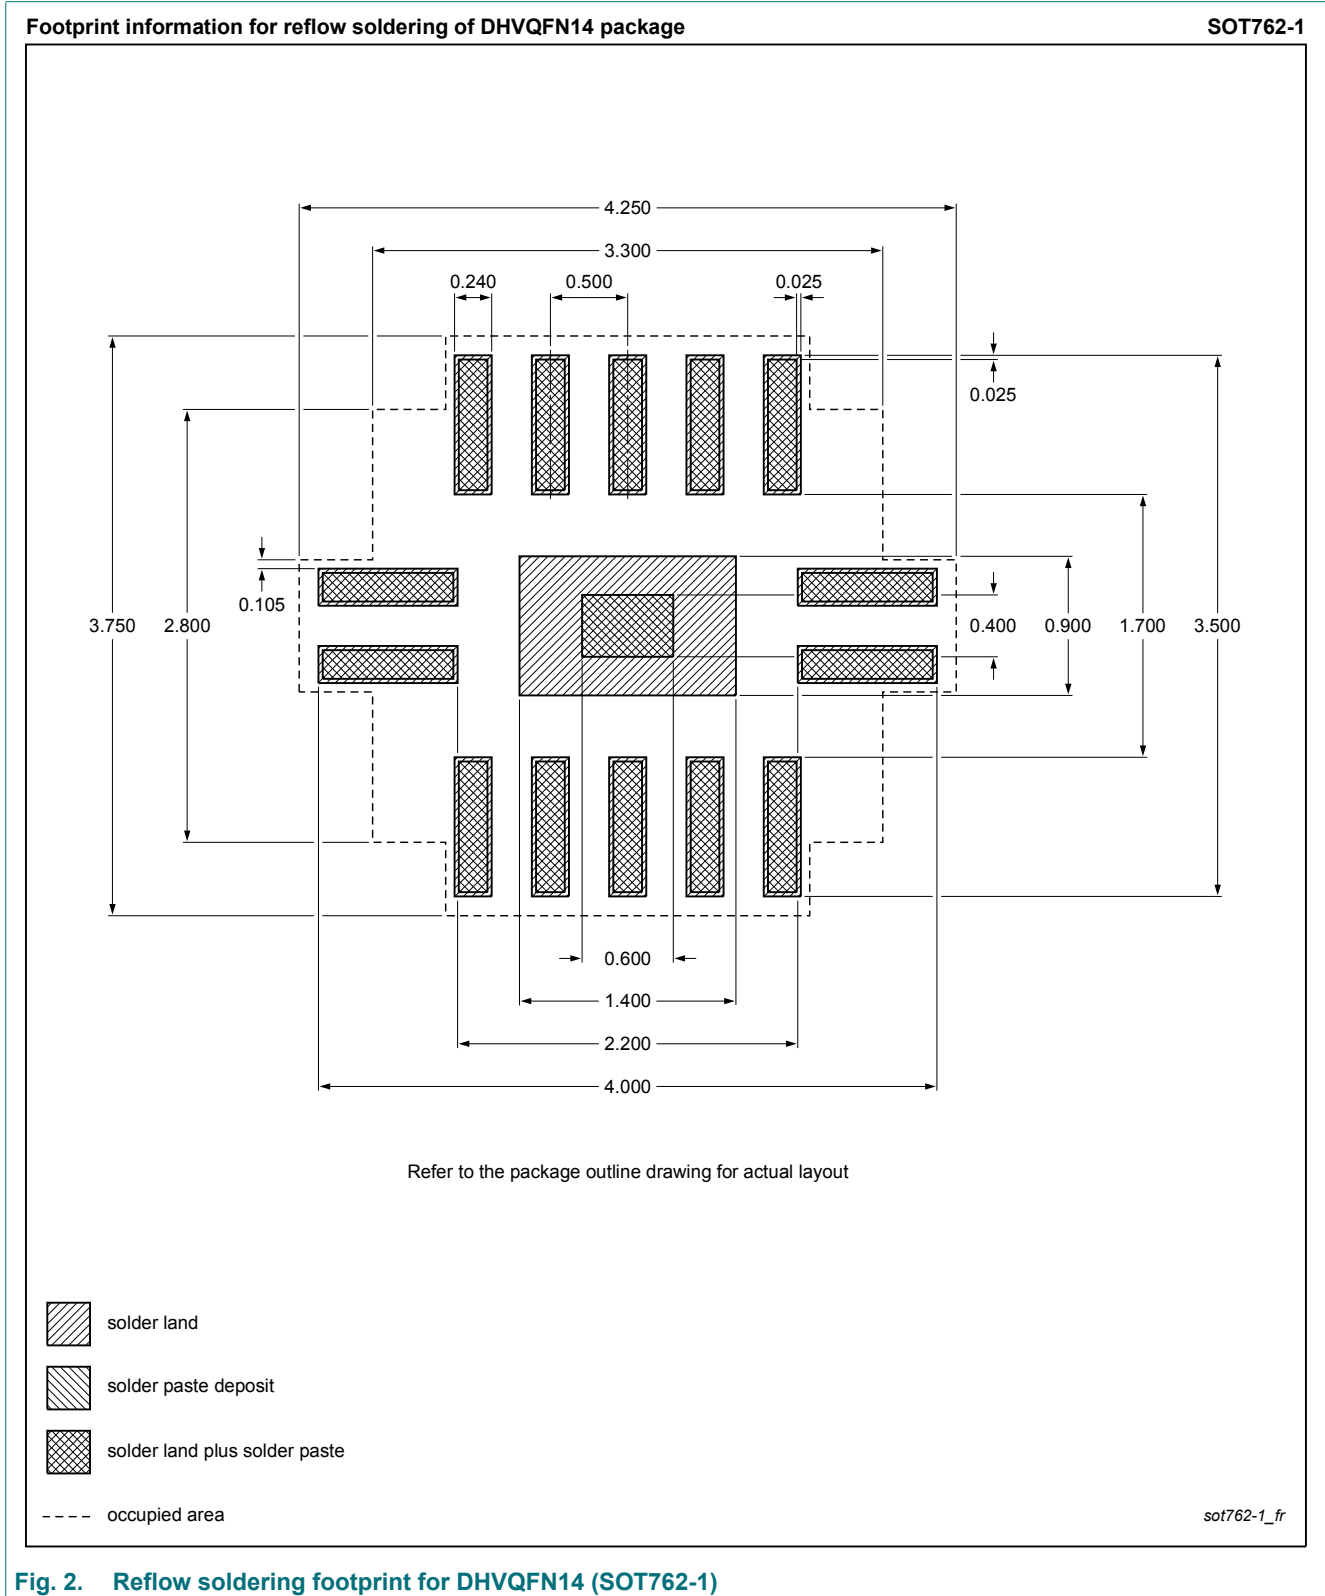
Reflow soldering footprint for DHVQFN14 (SOT762-1)
